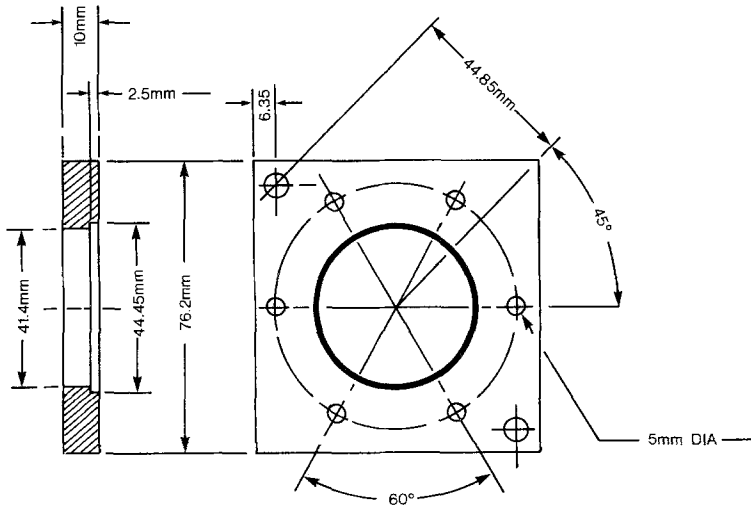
The details of the inner plate heliarck welded to the column at the top and bottom flange joints
